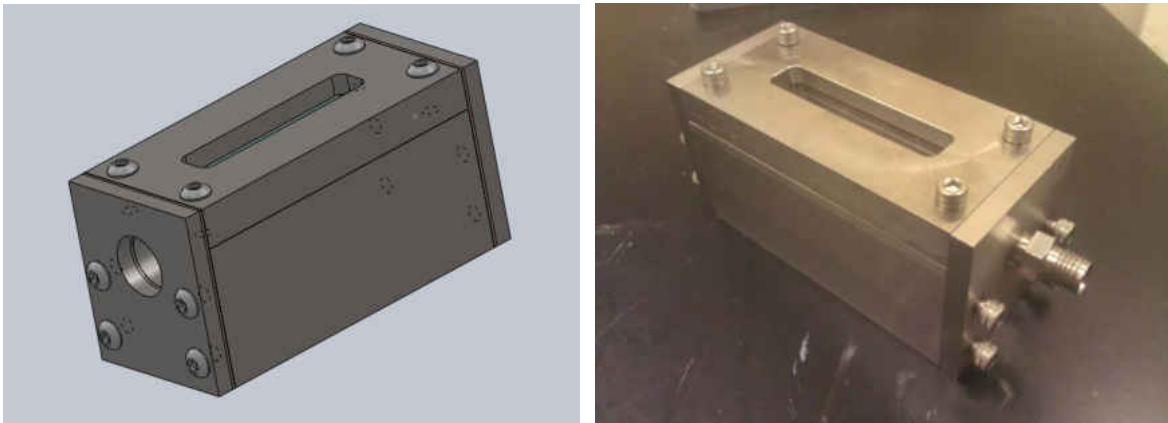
Combustion chamber 3D model and final manufactured assembly.
